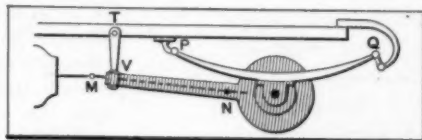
This type is very similar to Fig. 31 only that the constructor extends the casing into a T form and with the aid of a drop arm utilizes it as a torque rod. Longitudinal efforts are not produced, but the springs exfoliate.
